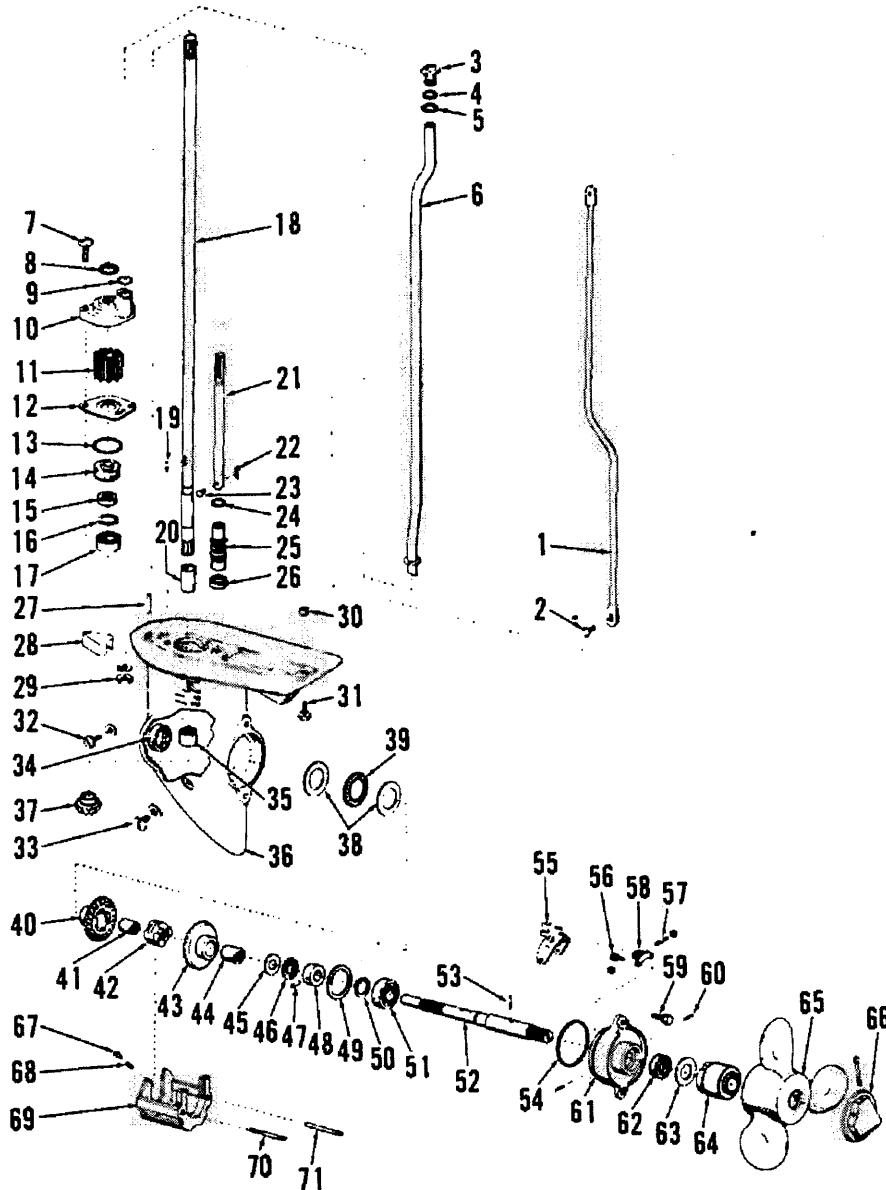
Exploded view of lower unit gearbox assembly. Lubricate water pump impeller (11) and water tube seal (9) with petroleum jelly when reassembling.
